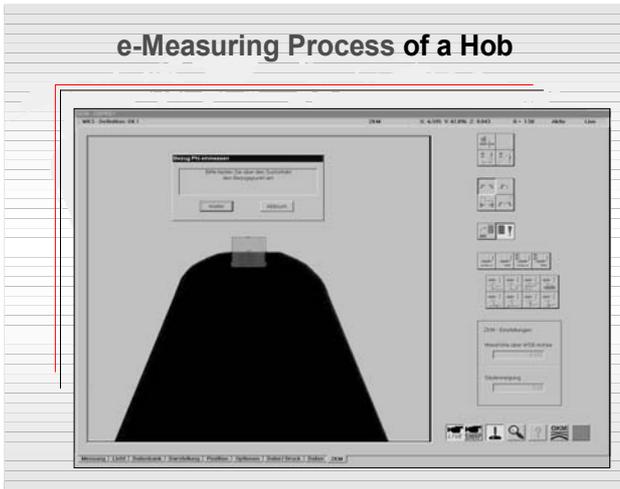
Optical e-measuring processes (www.okm-jena.de)
